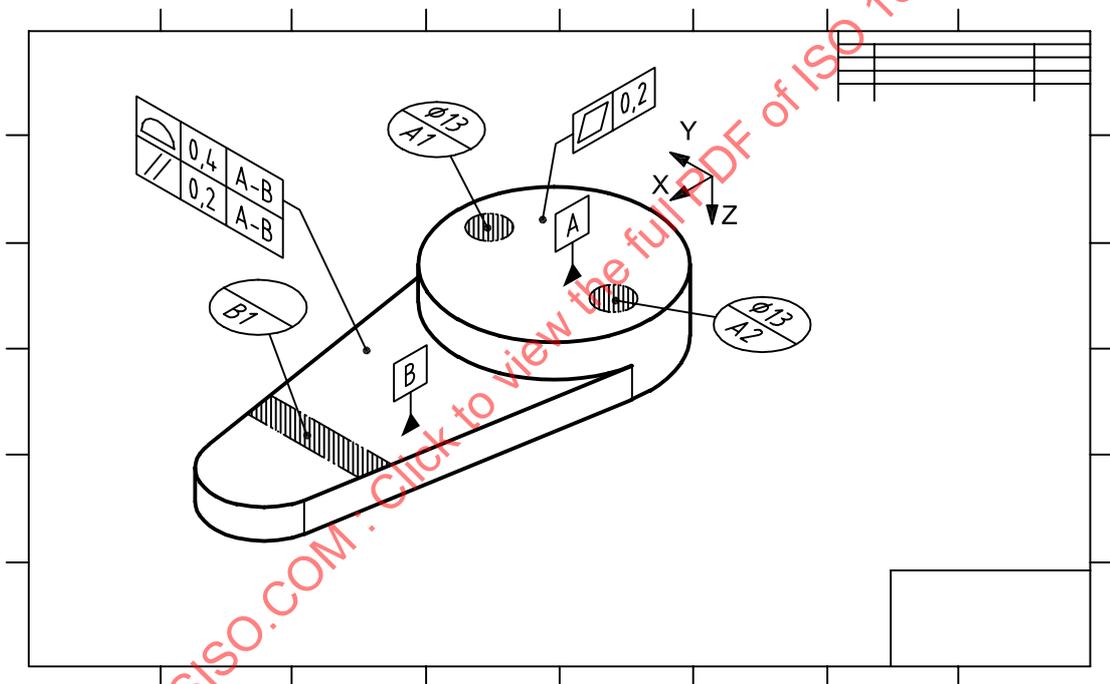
Datum targets and indicators in an axonometric view
